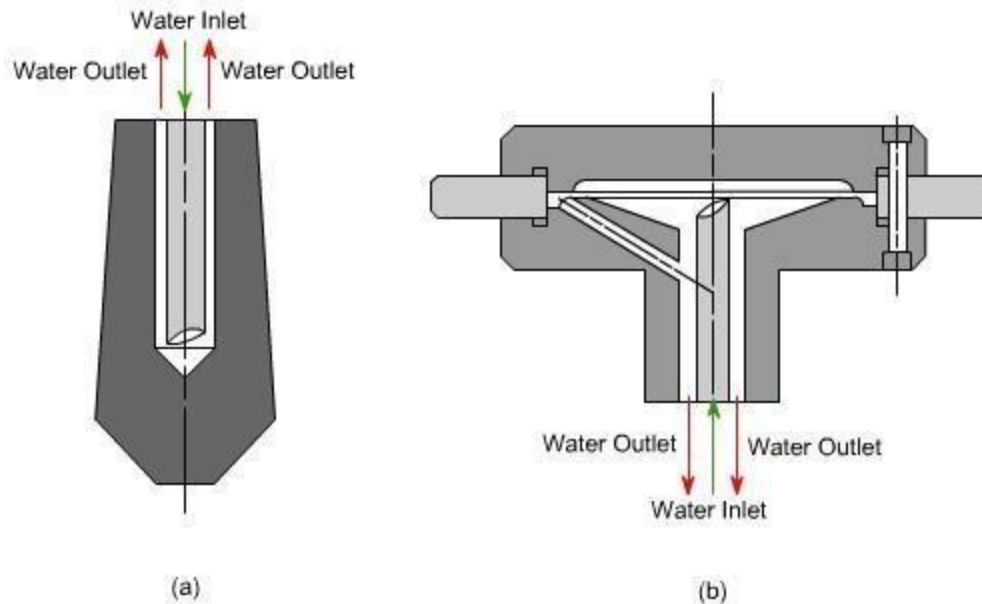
Water Cooling of Electrodes (a) Spot Welding (b) Seam Welding.
